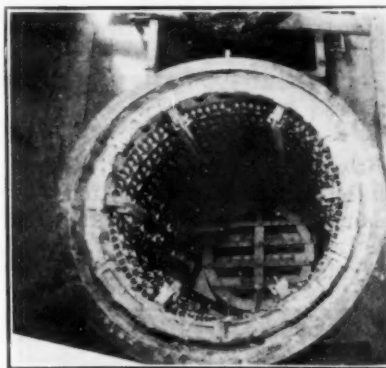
Interior of Pit Type Electric Furnace for Heat Treating Aluminum Alloy Castings. Cover Has Been Removed to Give View of Inside
